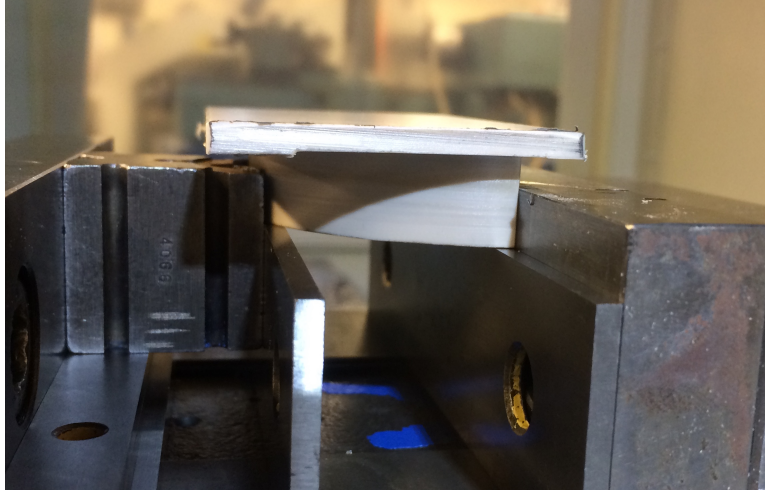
Manufacturing method for guide pieces. Image shows last operation for manufacturing the guide piece during which the guide is held with a V-block and the rectangular holding material is removed.
